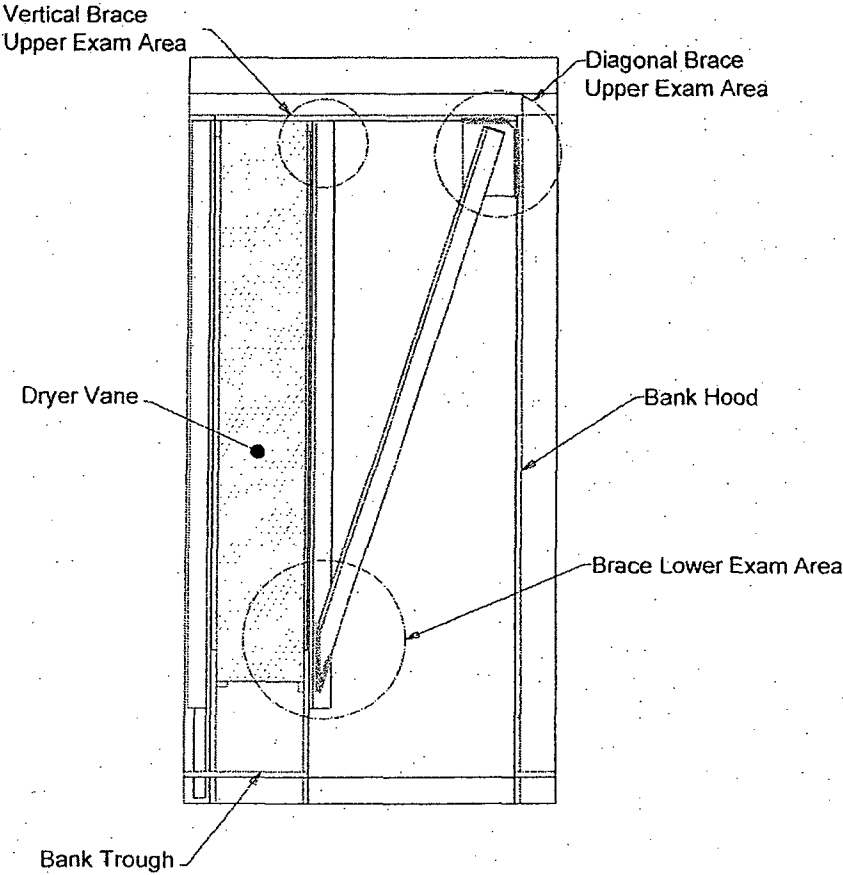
Dryer Brace Detail (Square Hood Dryer)
